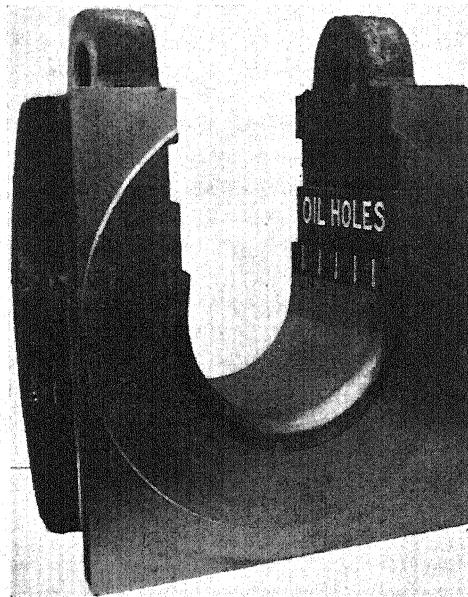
Coupled Wheel Axlebox showing Oil-delivery Holes and Unbroken Whitemetal Bearing Surface
